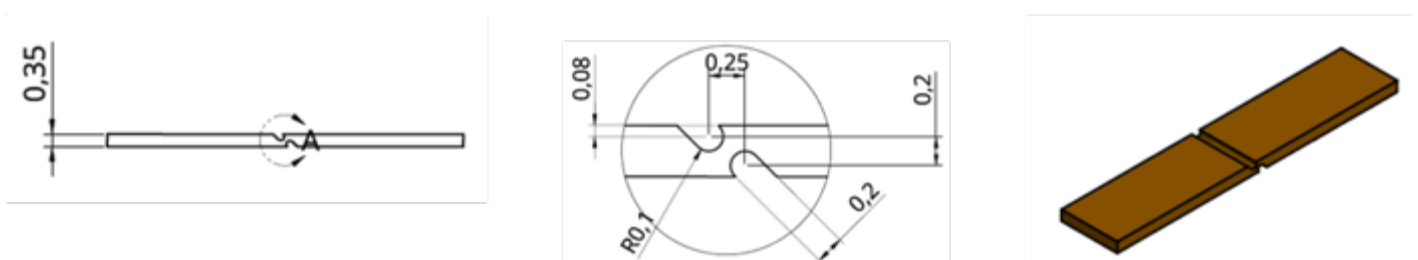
Typical geometry of test specimens. Notches allow the central zone to evidence shear loading when the test specimen is loaded in tension.
